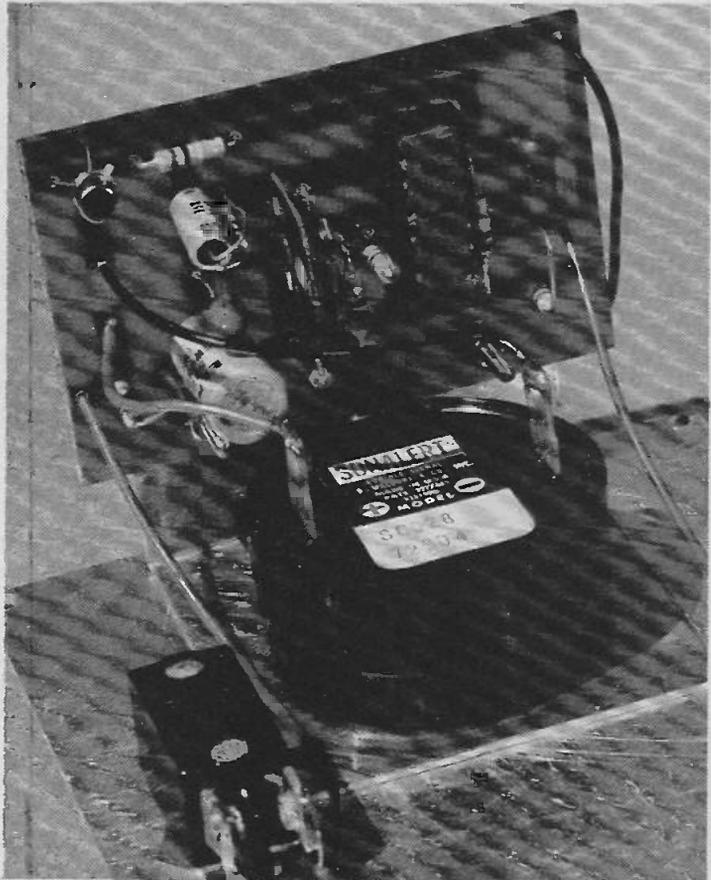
The printed circuit board is mounted on an aluminium bracket which, in turn, is secured to the front panel by means of the Sonalert.
